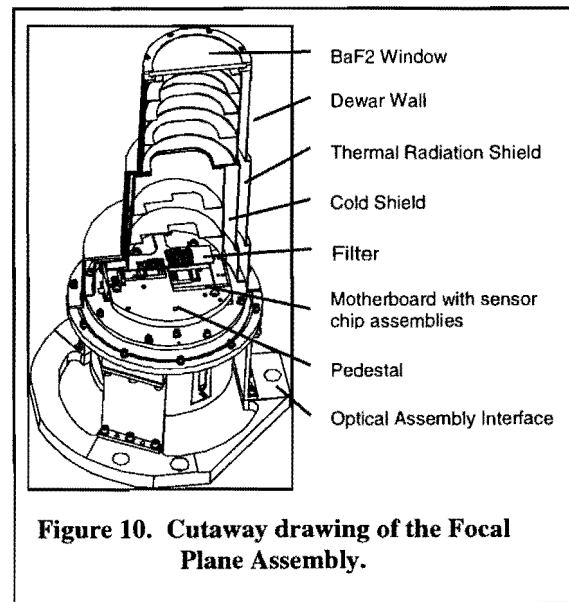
Cutaway drawing of the Focal Plane Assembly.
